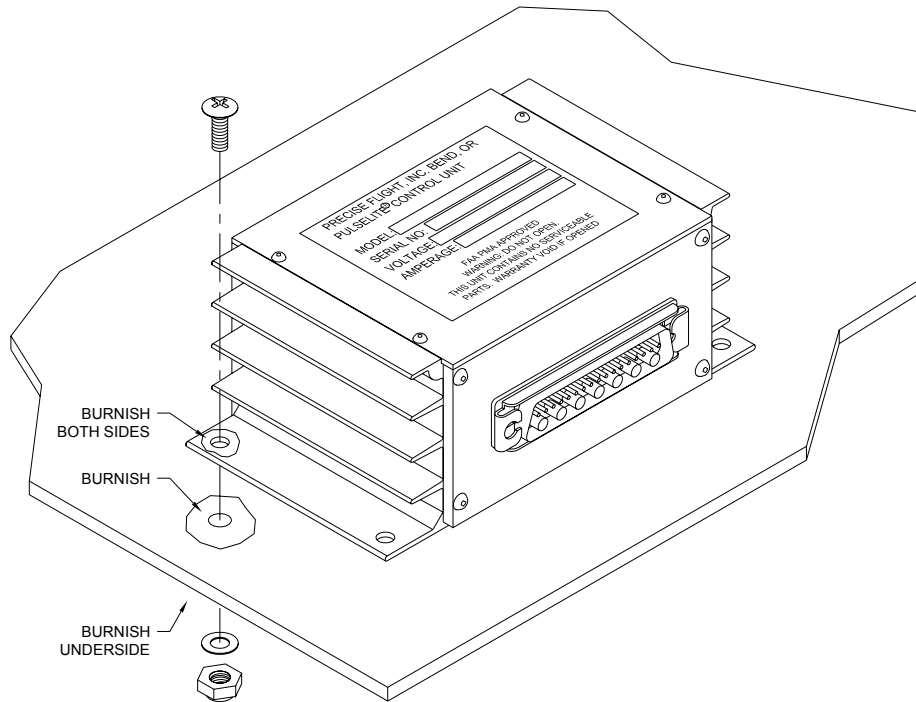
Typical Burnished Hole Mounting for Pulselite Model 3060 Series
